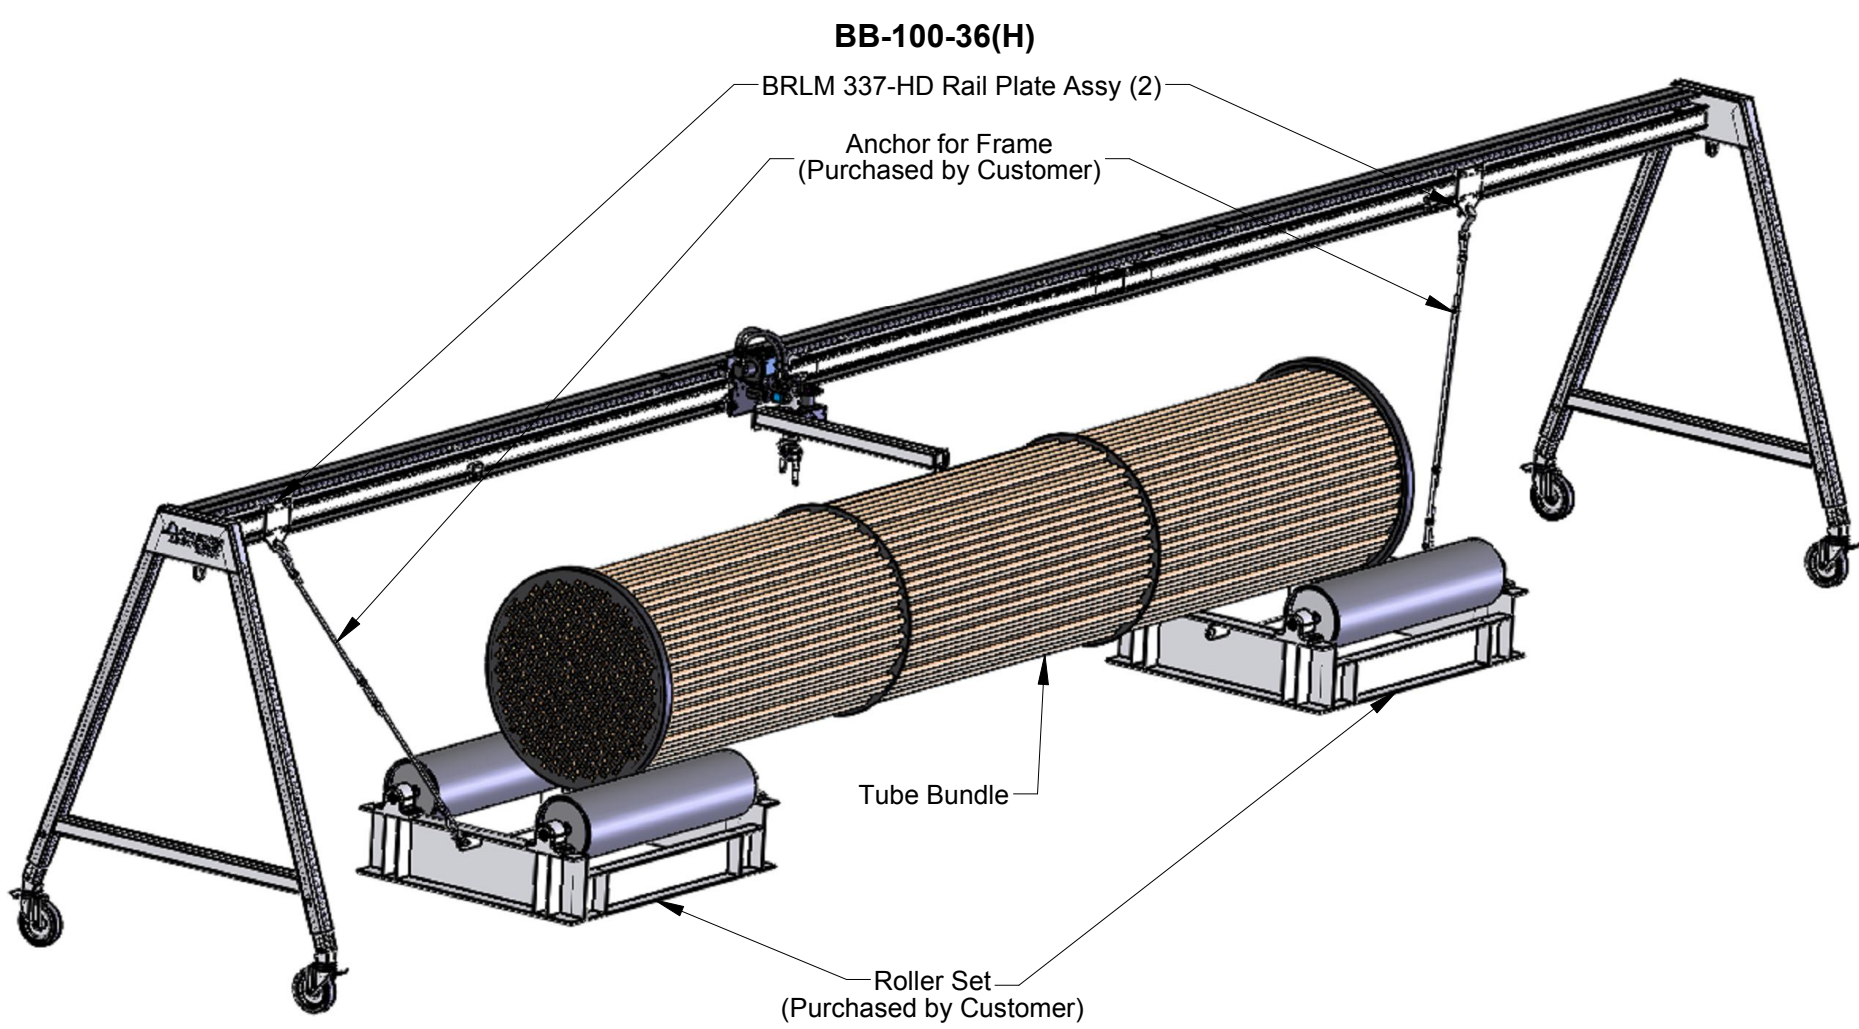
BB-100-36(H) Bundle Blaster Frame Assembly shown with a 40 inch X 18 ft tube bundle. For short tube bundles, anchor the frame assembly to the rollers using the optional rail plates as shown above.
